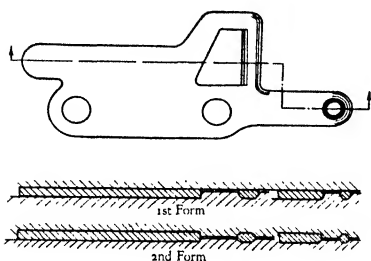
A heavy-gauge blank the edges of which were radiused in two operations.
